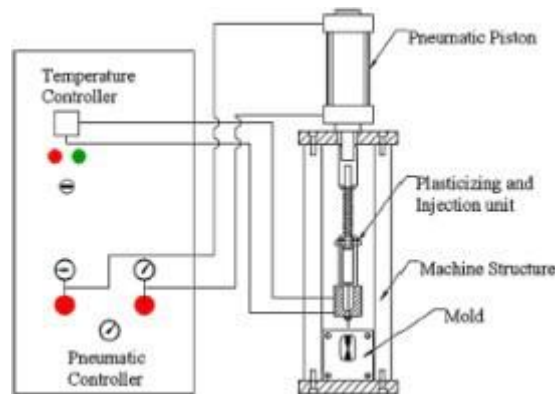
Vertical Injection Molding Schematic Diagram [5]
